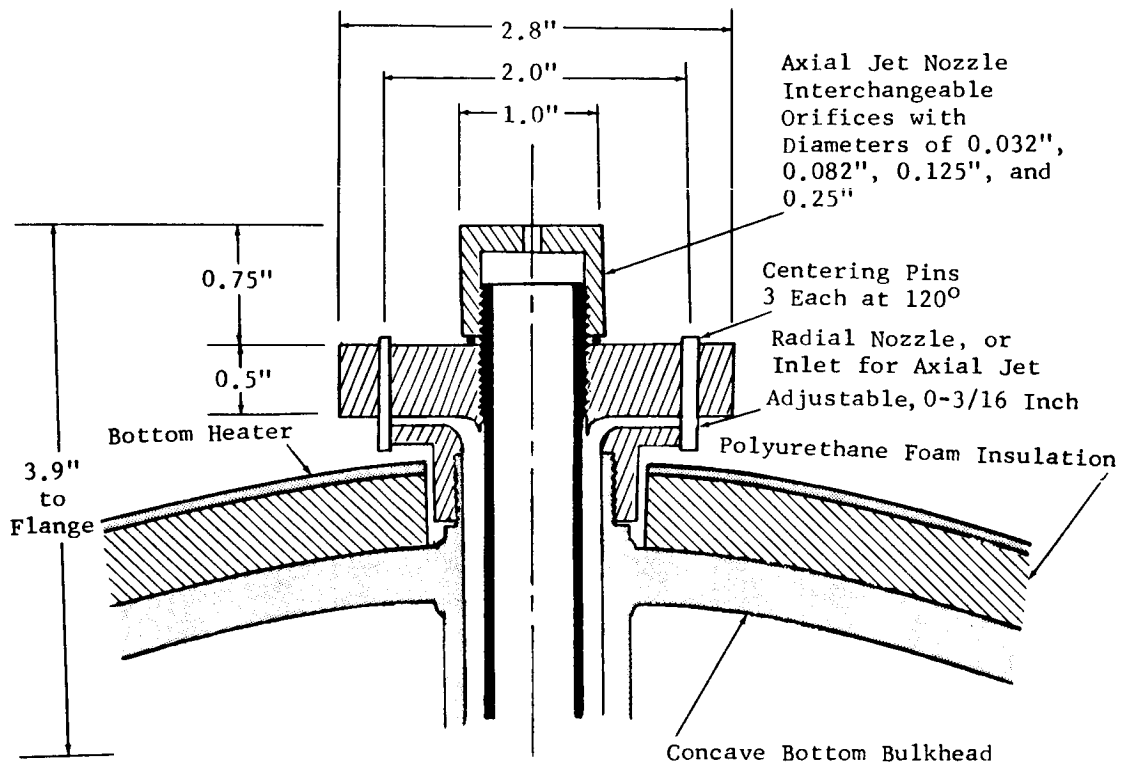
Schematic of Axial Jet Nozzle Assembly
